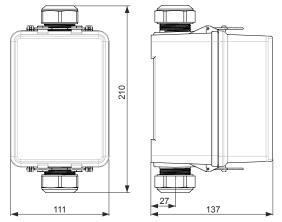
DFU 911 dimensioned drawing and drilling plan
